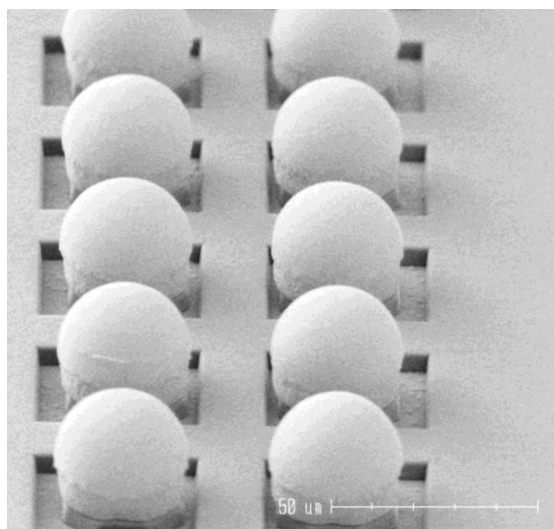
SEM image showing the solder bumps on a pixel chip [103]
